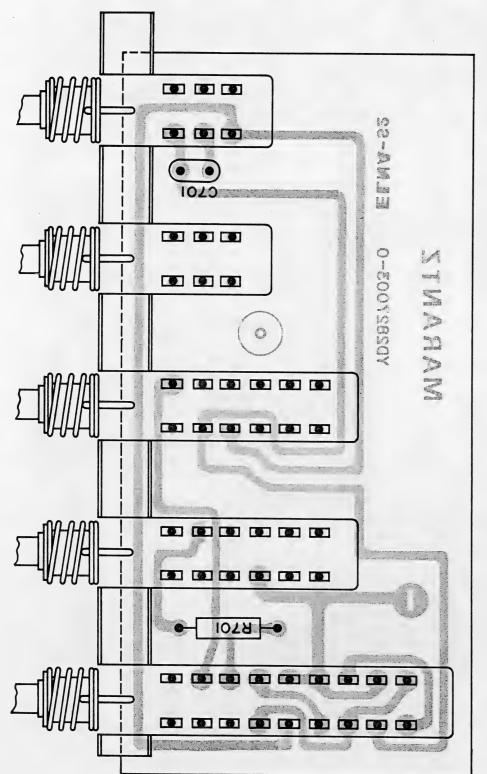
Mode Selection Switch Unit Assembly P700 Component Locations
